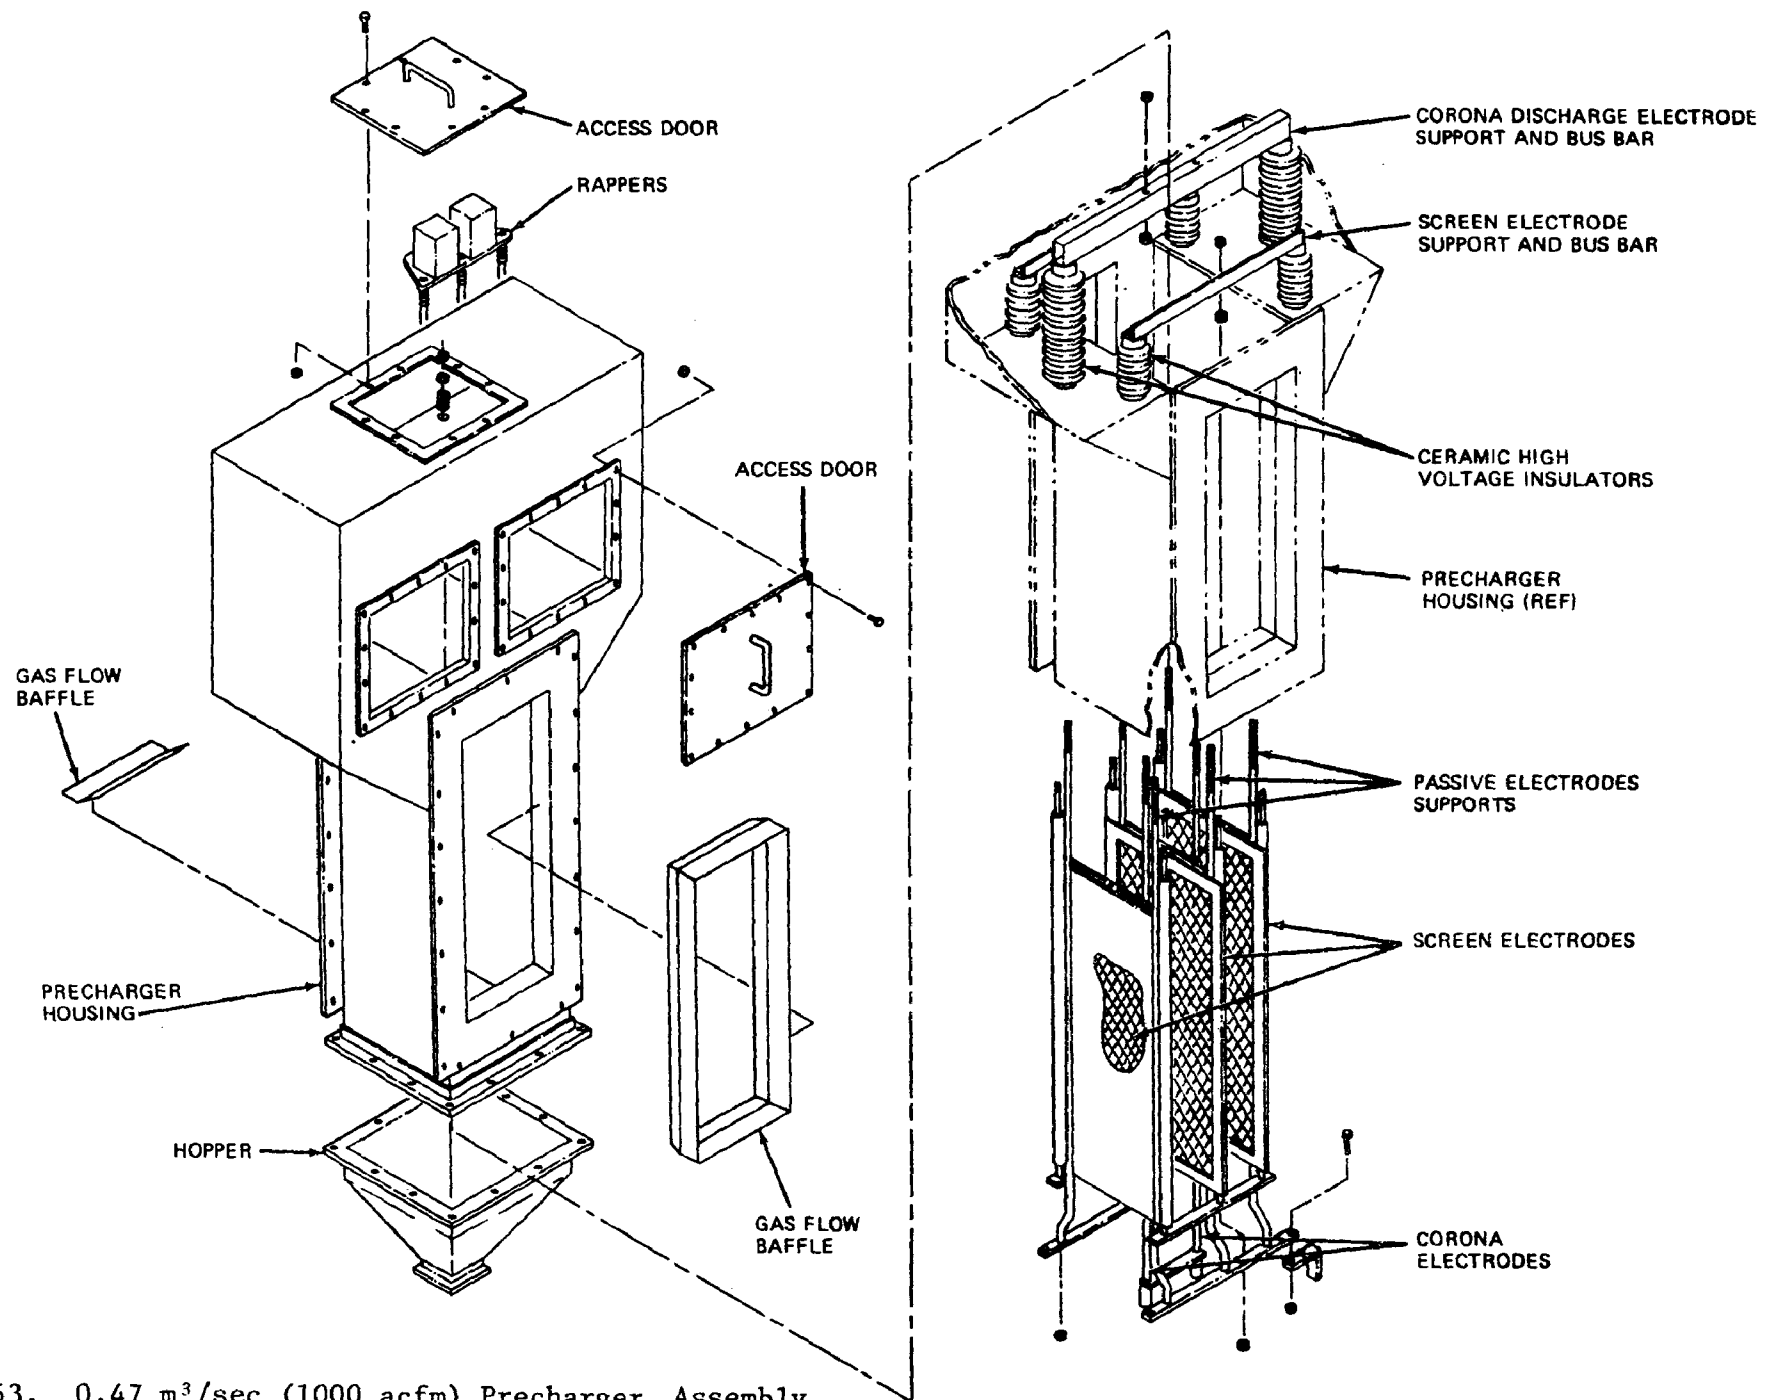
0.47 m³/sec (1000 acfm) Precharger Assembly.
